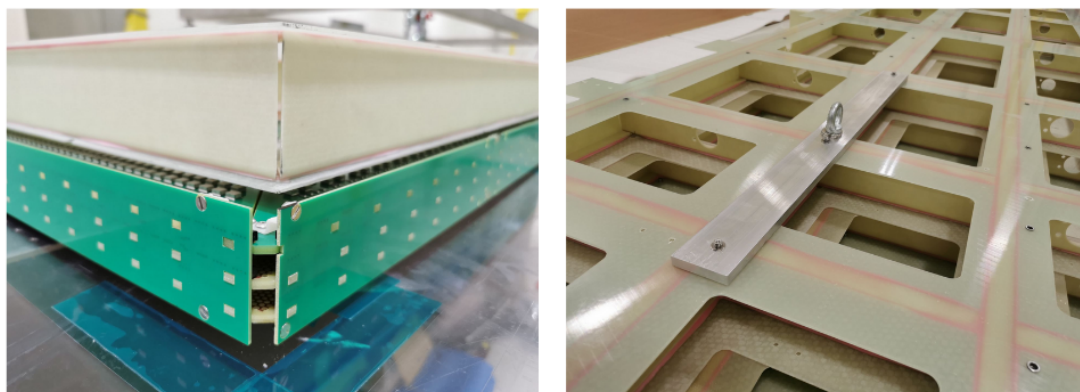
Left: new edge cards with regular openings to have better engagement with the anode panels and adapter boards. Right: Bottom CRP composite frame and openings for cable routing within the structure.
